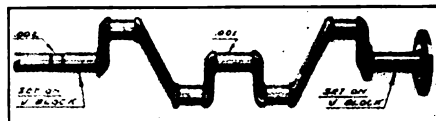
THE CRANK SHAFT SHOULD CHECK TO THESE LIMITS
